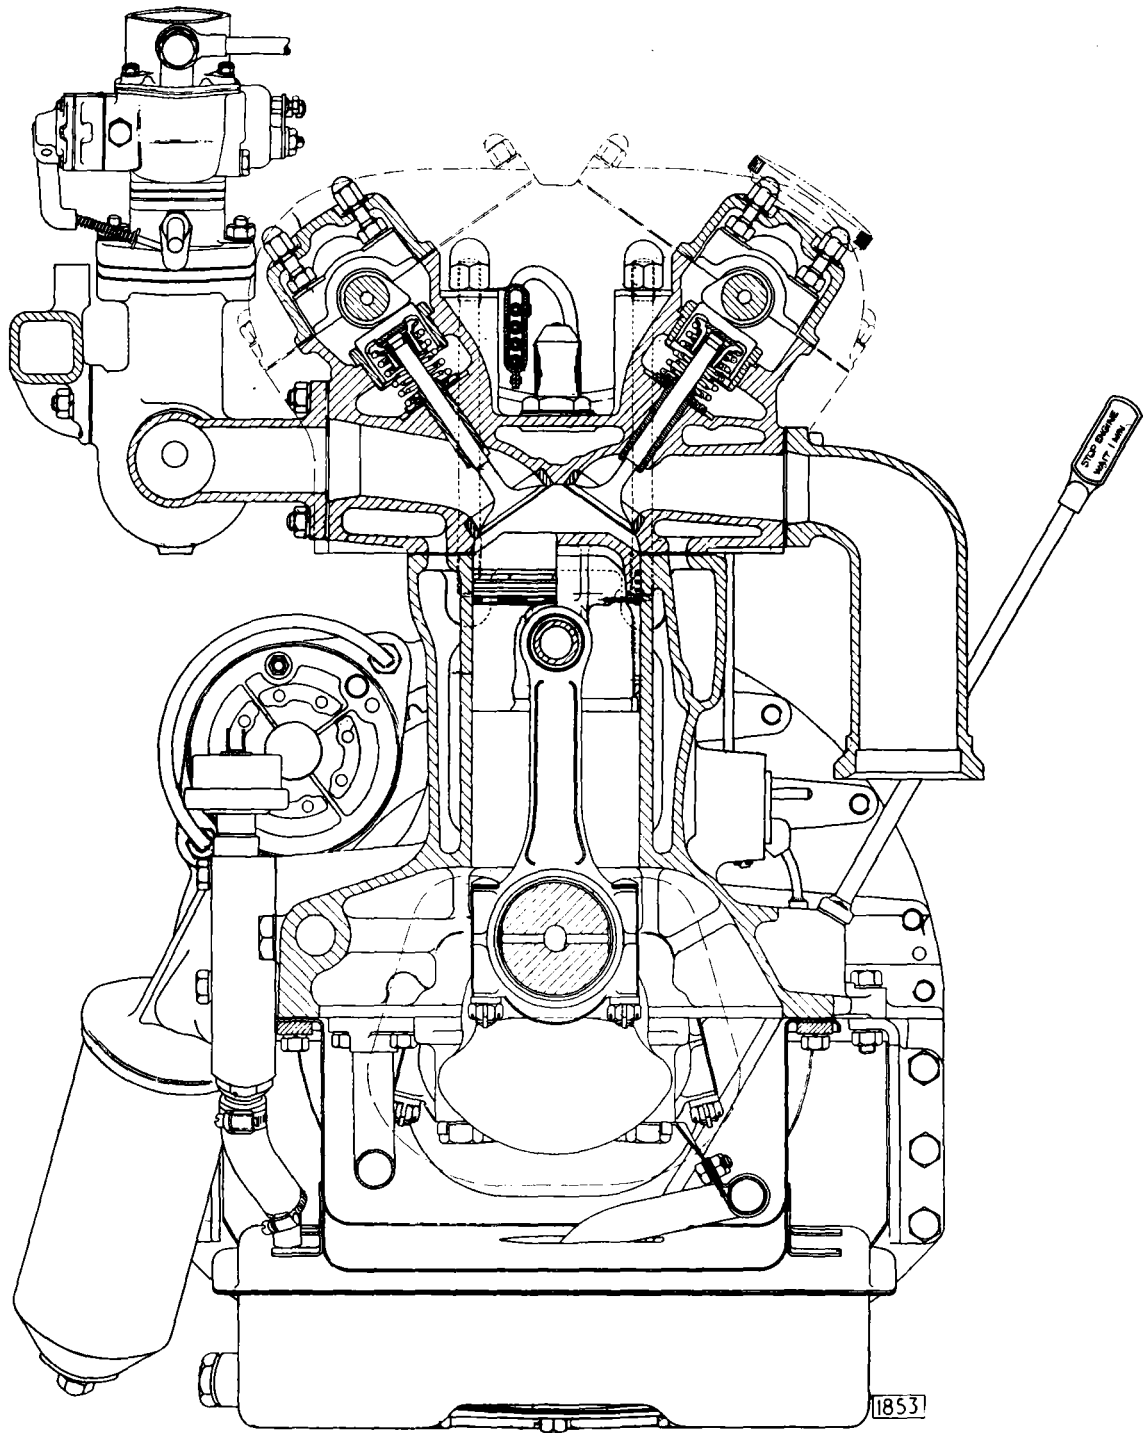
Cross sectional view of engine (2.4 litre engine illustrated).
